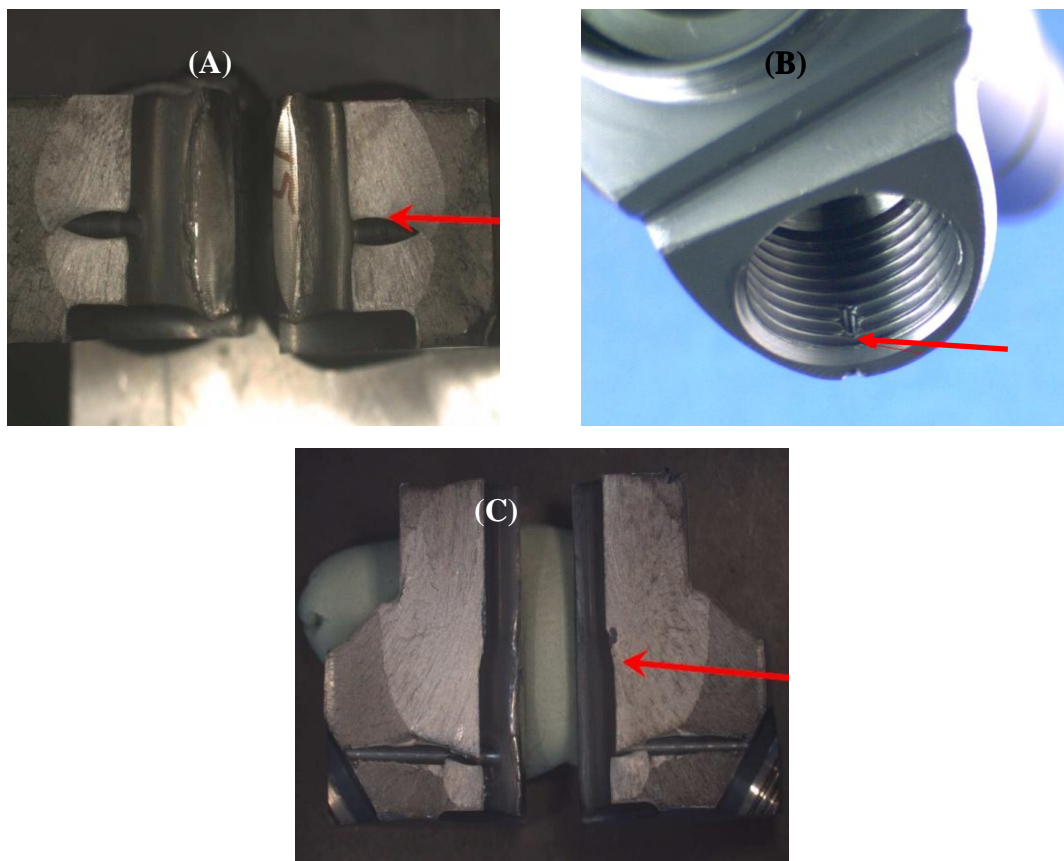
Macro image of crack starting points from seal surface (A), thread (B) and hole diameter decrease (C)
